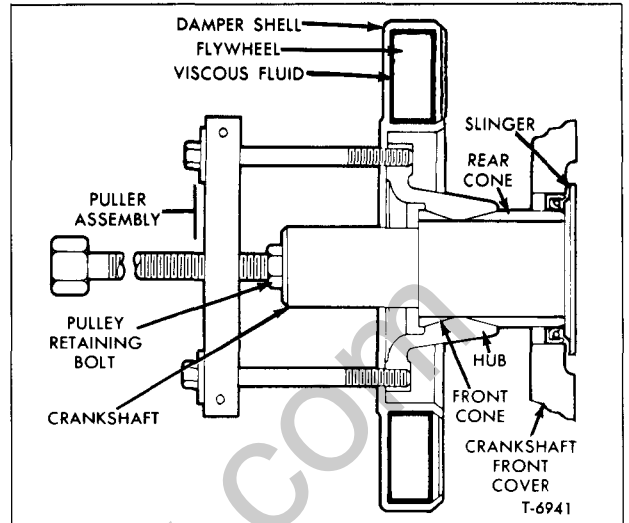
Use of Puller to Remove Damper Hub From Crankshaft
